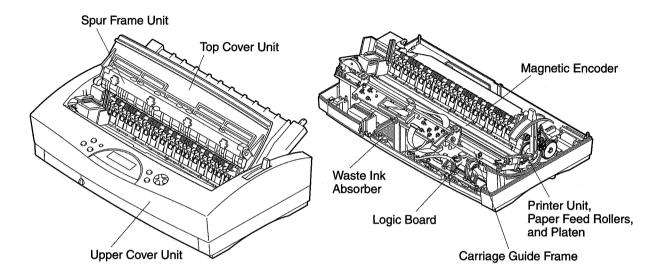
Parts Liable to Damage During Disassembly and Assembly
